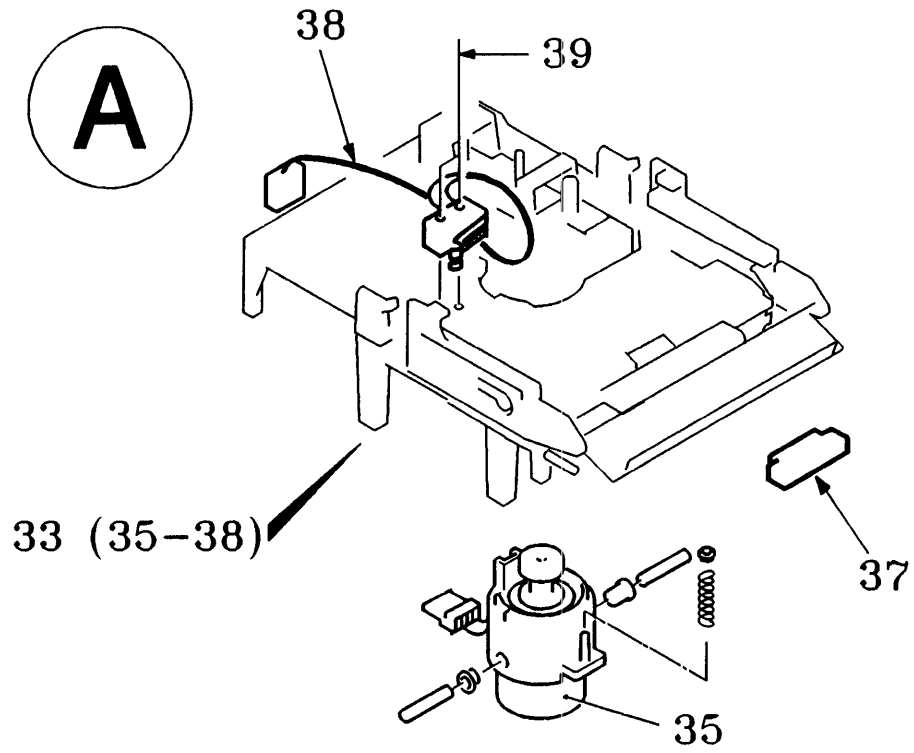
HP 9144A Exploded View (sheet 1 of 2)
